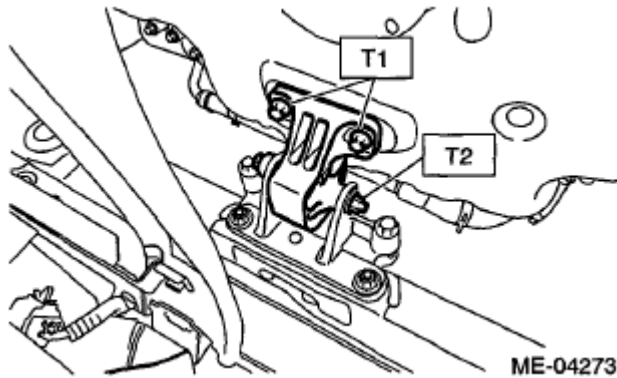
Identifying Front Mount Mounting Screws With Torque Specifications
